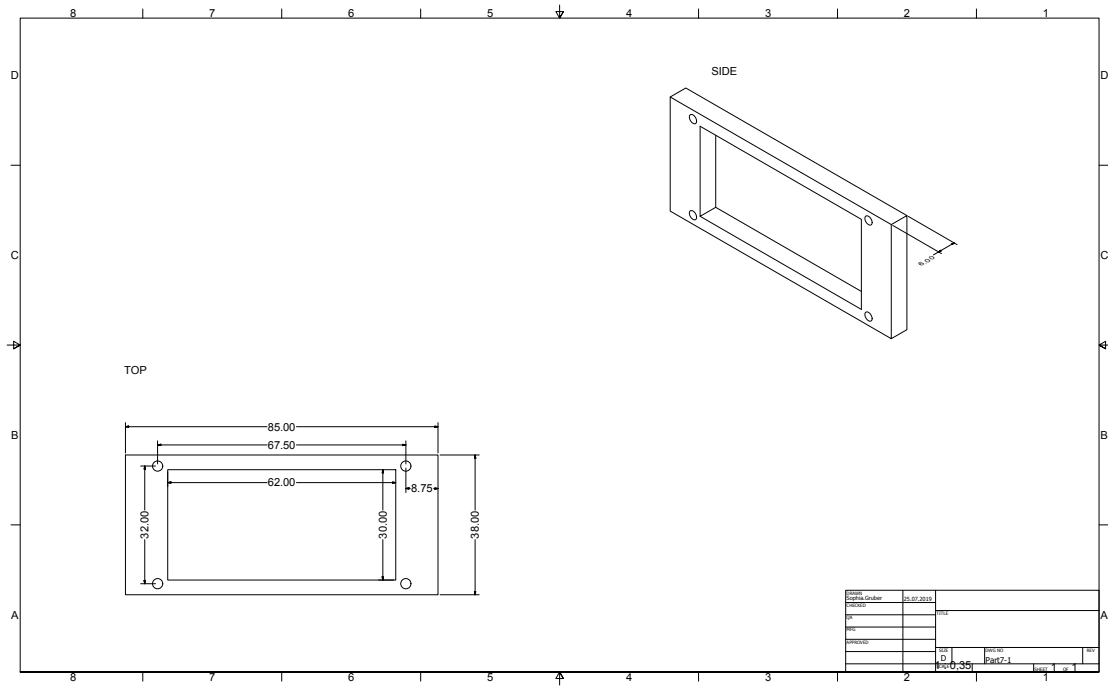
Technical drawing multichannel FC holder top. Top of multichannel FC holder; made either of aluminium or iron.
